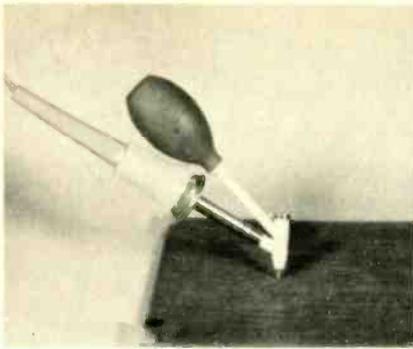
COMBINATION SOLDER IRON and vacuum bulb is one of the most effective ways to remove solder.
